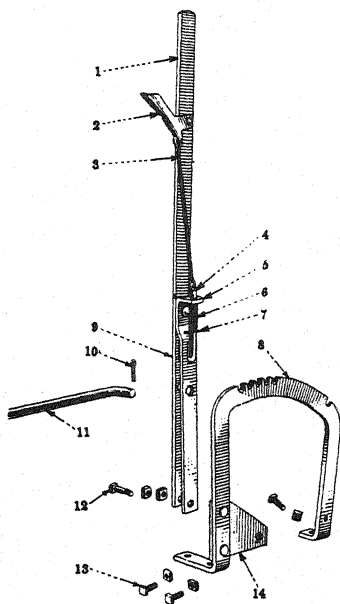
Parts of a hand-operated lever. 1—Lever. 2—Latch. 3—Latch rod. 4—Spring bolt. 5—Guide. 6—Spring. 7—Cotter. 8—Quadrant. 9—Lever spring box. 10—Cotter. 11—Lifting link. 12, 13—Bolts. 14—Support plate.
